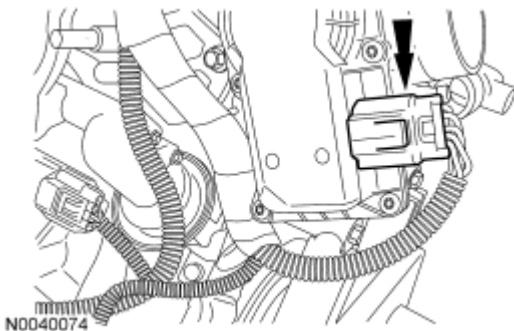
Locating Electronic Throttle Body Electrical Connector
